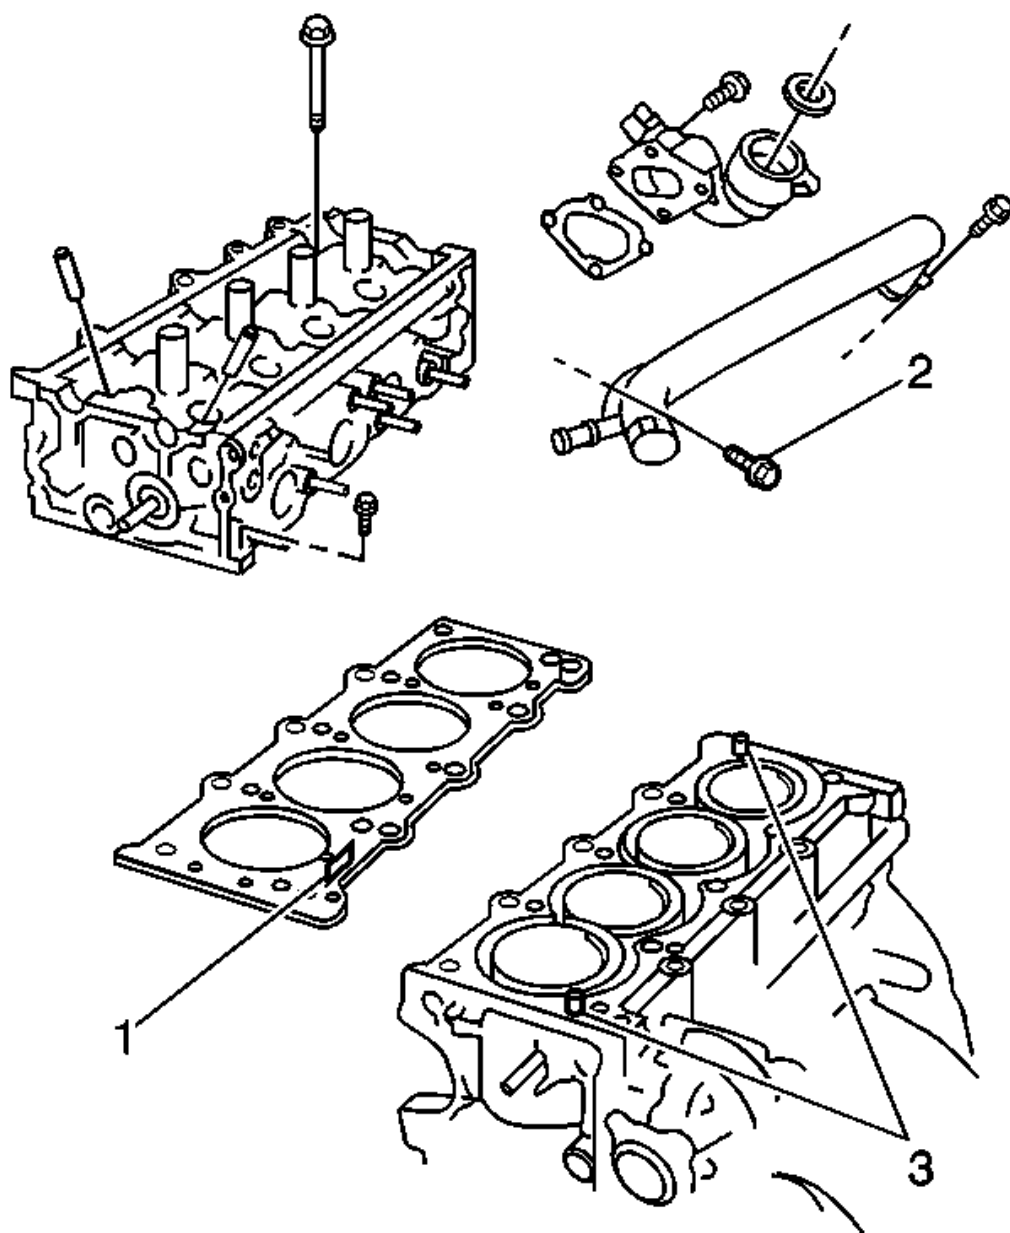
View Of Cylinder Head Gasket & Dowel Pins
